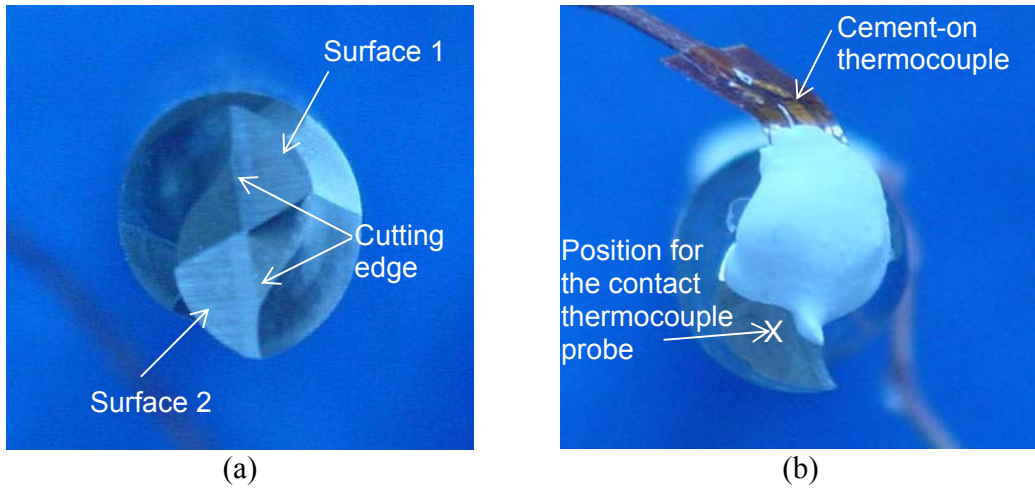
Tool tip and thermocouple locations: (a) view of tool tip with two symmetric Surfaces 1 and 2, and (b) tool tip with the cement-on thermocouple attached to Surface 1 and the position for the contact thermocouple.
